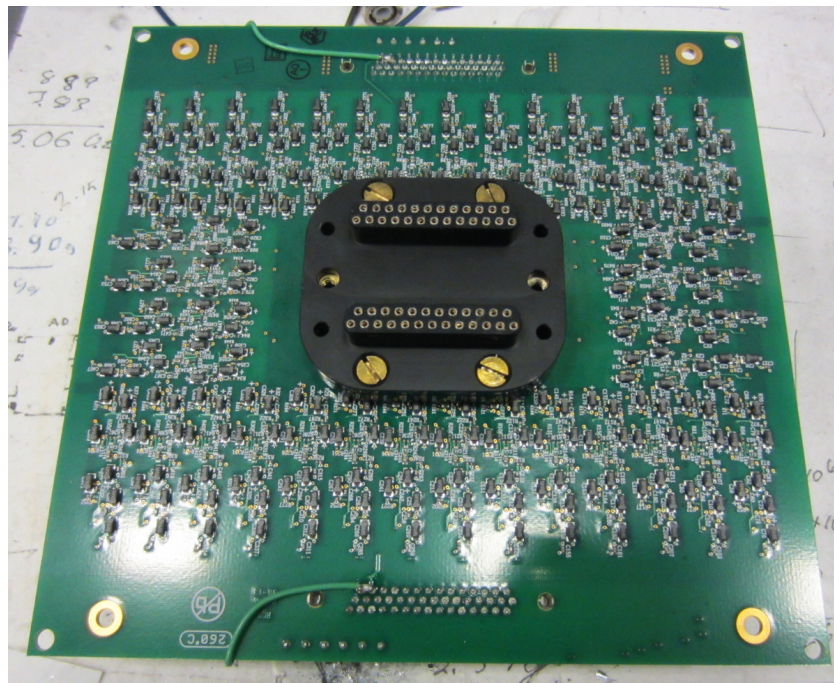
Preamp board bottom with double 25 pin Dsub adapter plug.
